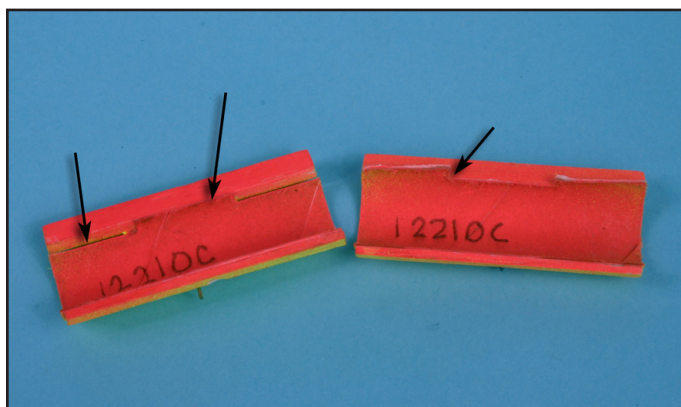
The interlocking-index tab has to be put on the runner side of the cradles. Here, the tabs interlock under the runners. This still causes slow opening of the cradles.
